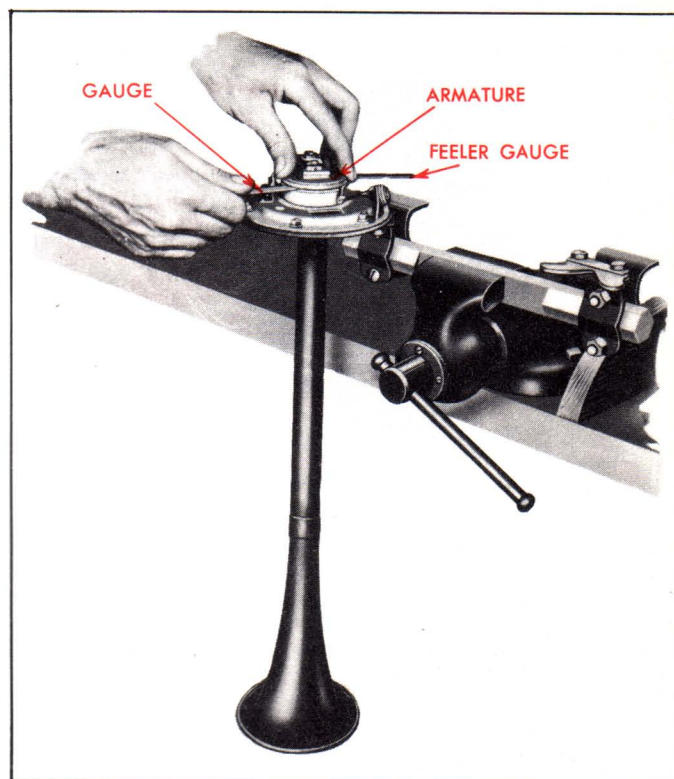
ADJUSTING THE ARMATURE AIR GAP. On this type horn, the air gap is adjusted by inserting two feeler gauges of the proper thickness and turning the armature until the gauges are a snug fit. It is usually necessary to loosen the armature lock nut and tap the spring plate lightly to free the armature and allow it to be turned.
